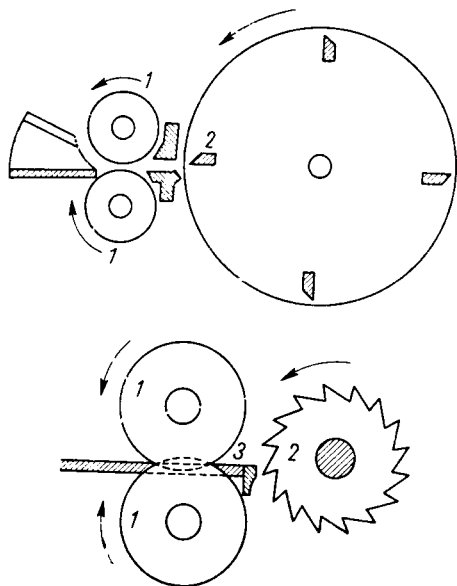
A French design for cutters for wide powder strip, according to Vennin *et al.* [13]; 1—rollers cutting lengthwise; 2—rotational knife cutting crosswise; 3—fixed knife.
